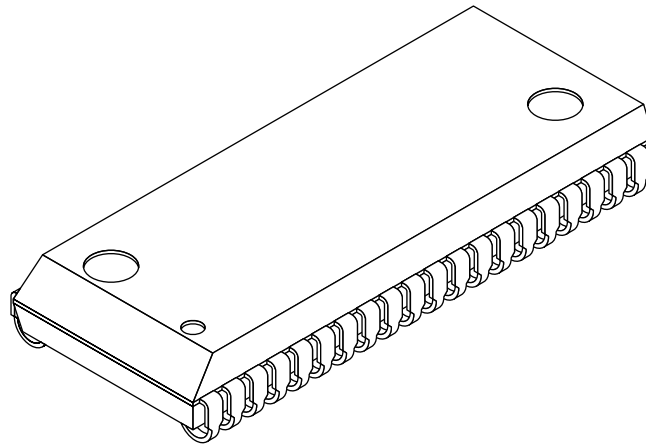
40-Pin 400 mil SOJ Package Dimensions
